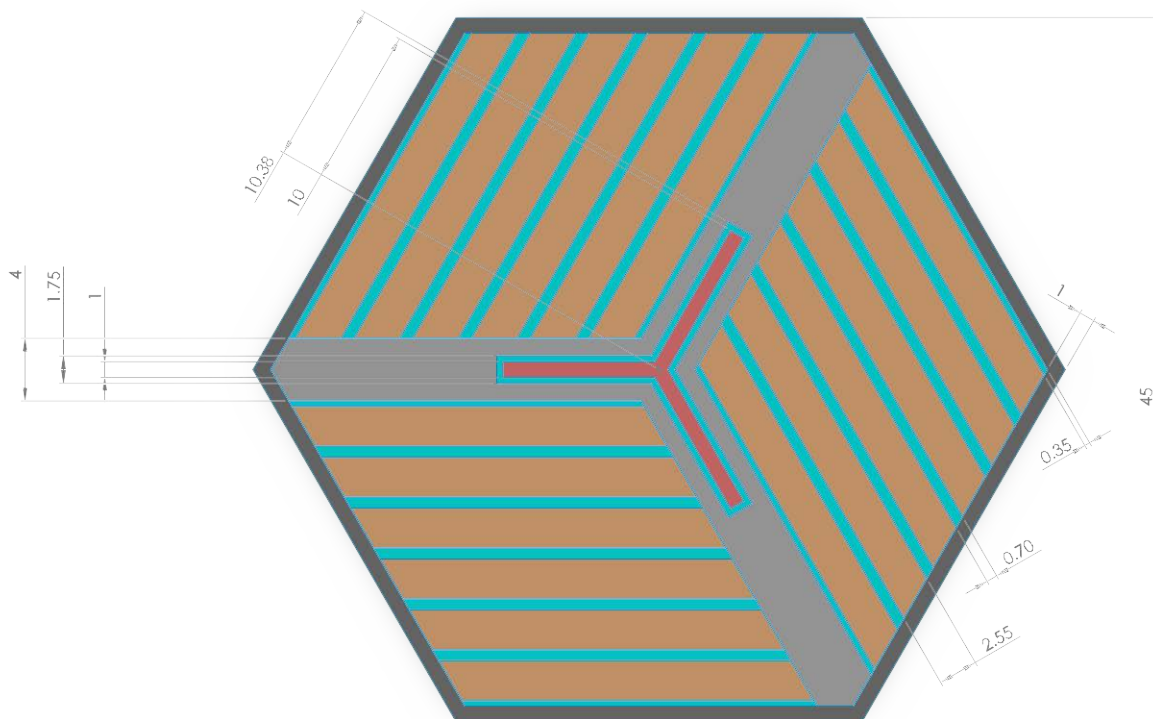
AHTR fuel assembly reference dimensions. (Varma, et al., 2012)
